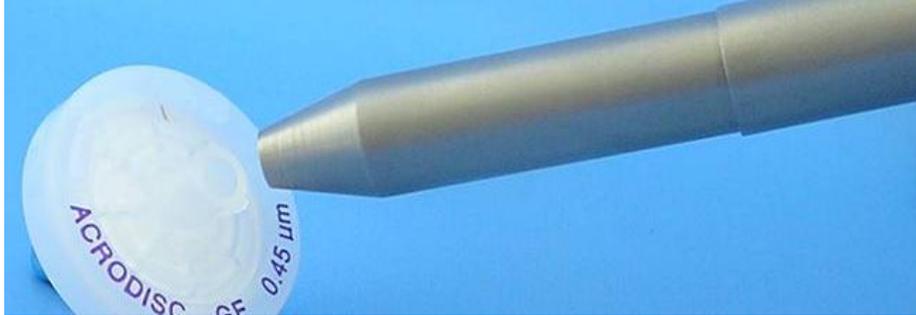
Leak testing of a laser weld.
